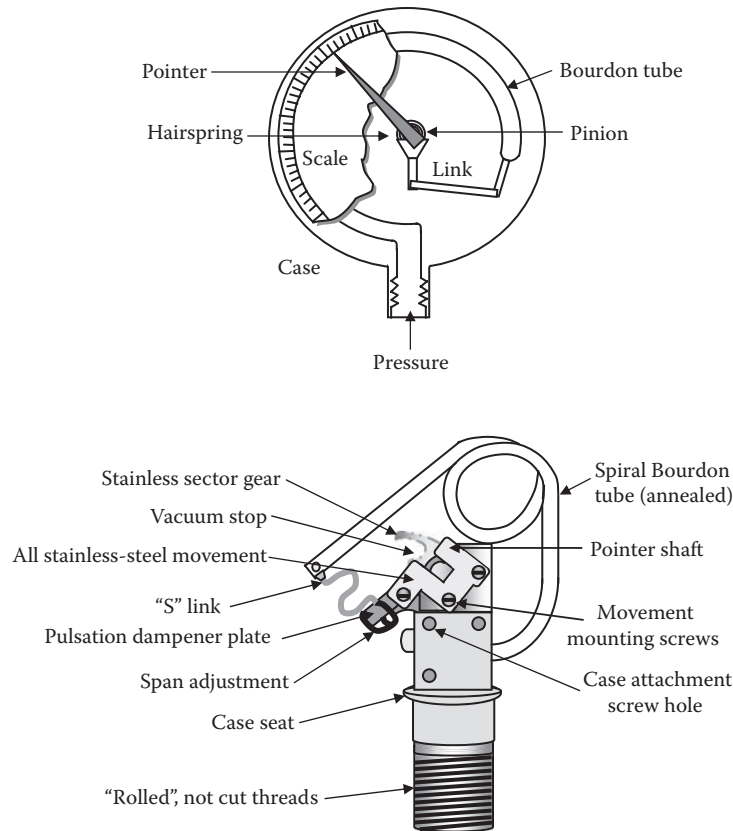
(Top) Bourdon tube gauge; (bottom) internal components.
